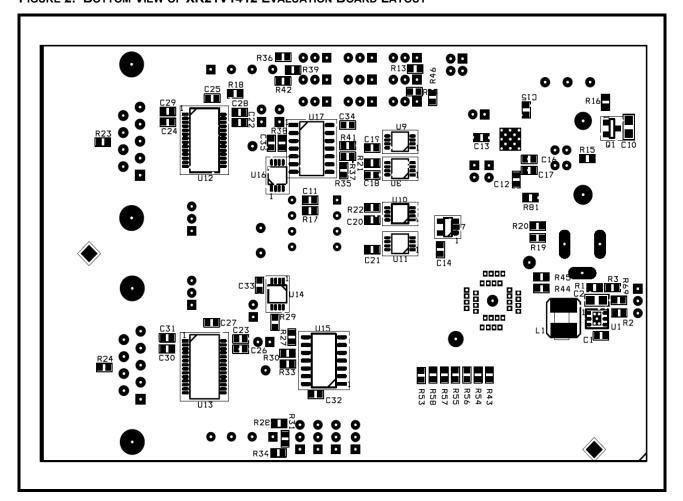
shows a bottom view of XR21V1412 evaluation board layout.
